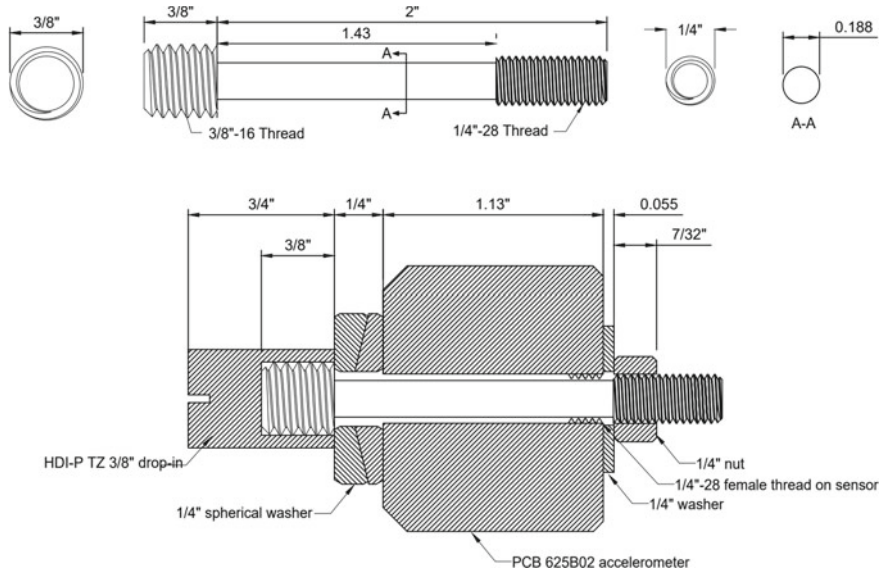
Custom threaded 3/8"-16 to 1/4"-28 stainless steel rod
